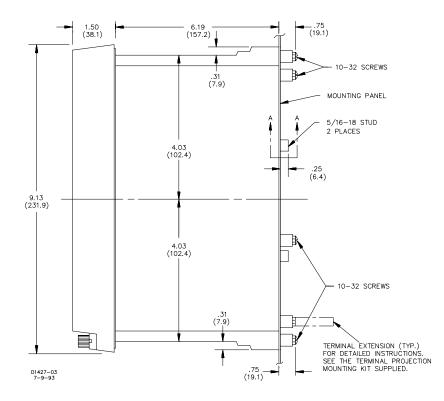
S1 Case, Double-Ended, Projection Mounting, Outline Dimensions, Side View
